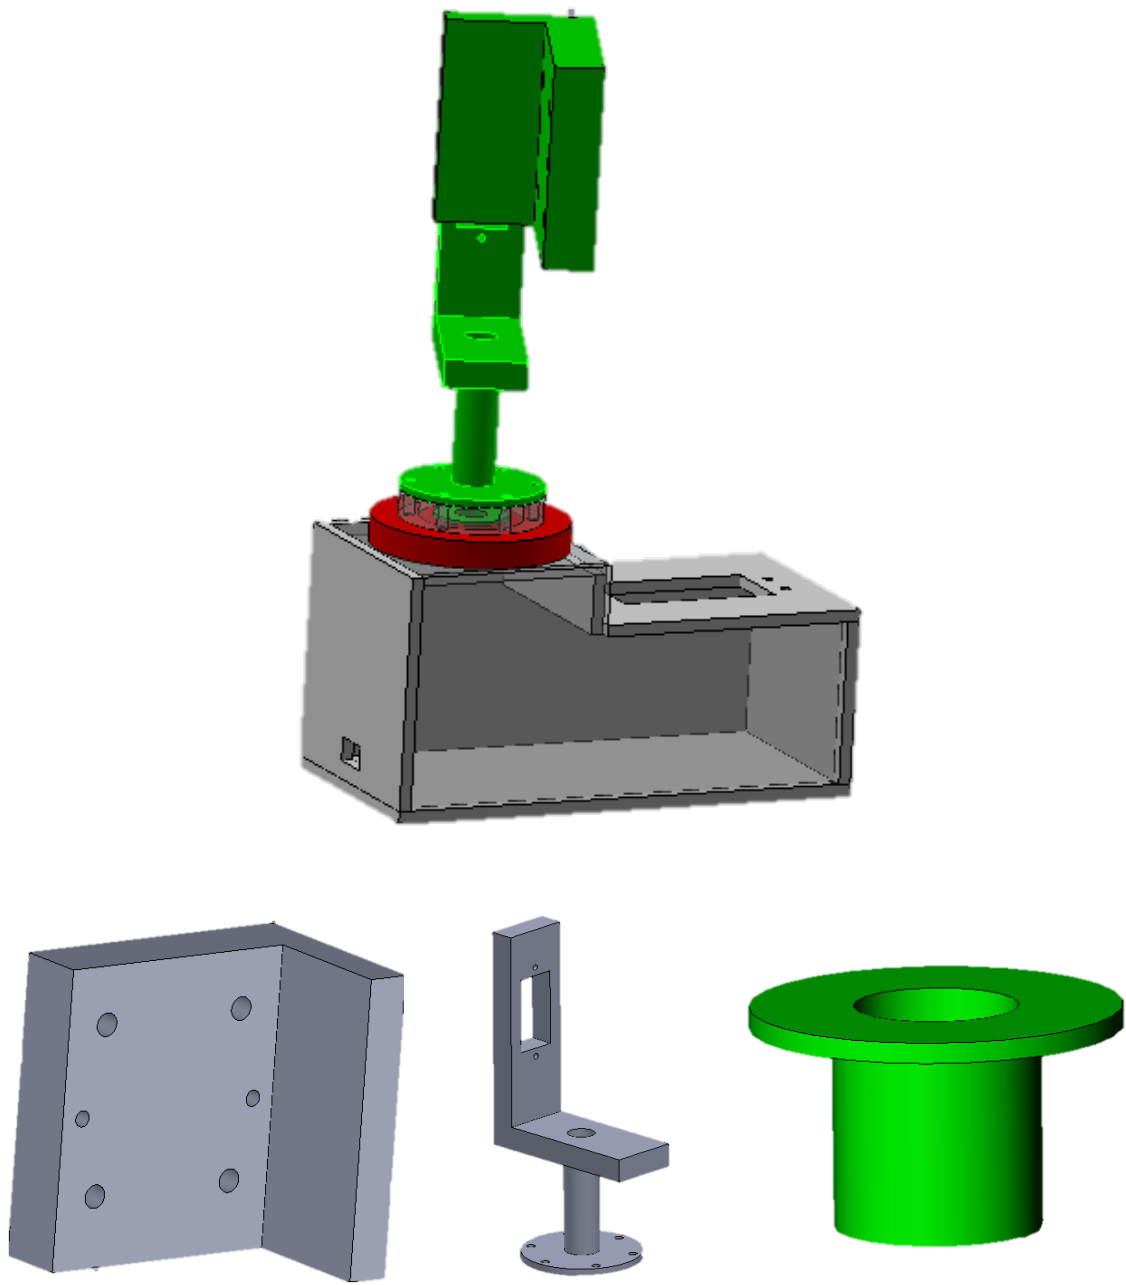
The mount assembly (top) and the three 3D printed parts: the sensor mount (bottom left), bracket (bottom center), and wirefeed (bottom right).
